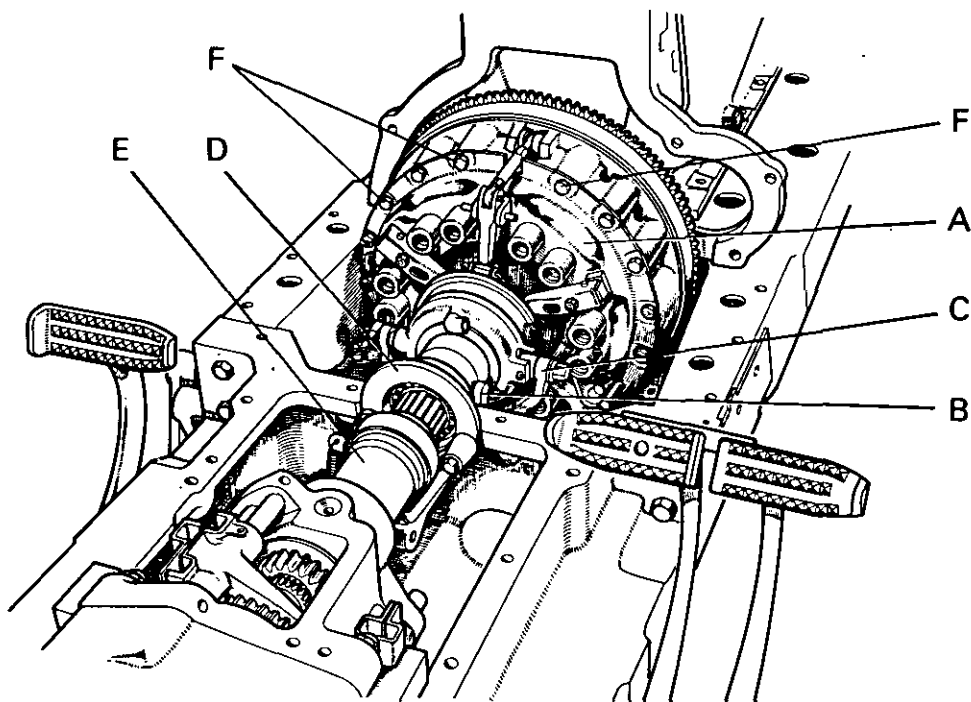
1200 TRACTOR WITH CLUTCH HOUSING AND GEARBOX COVER REMOVED
